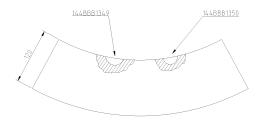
SAMPLE GEOMETRY AND FLAW LOCATIONS FOR 15 mm TARGET DEPTH CRACKS
